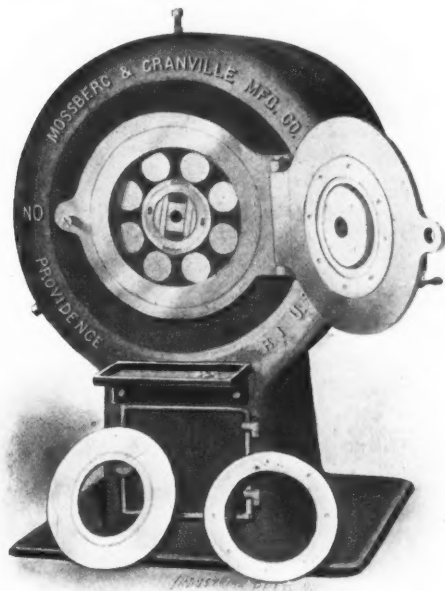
Rotary Swaging Machine, showing Dies and Rolls.
